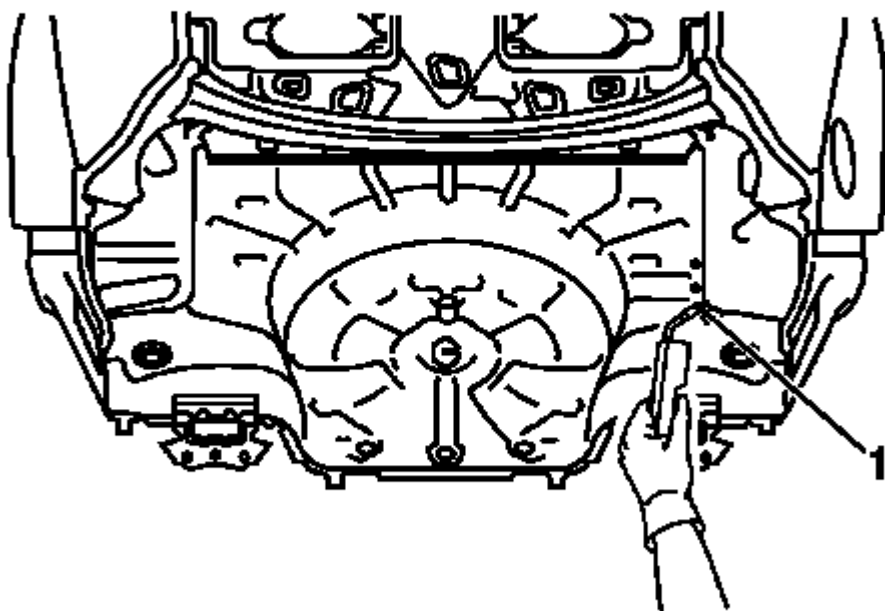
Welding Rear Compartment Floor Panel
